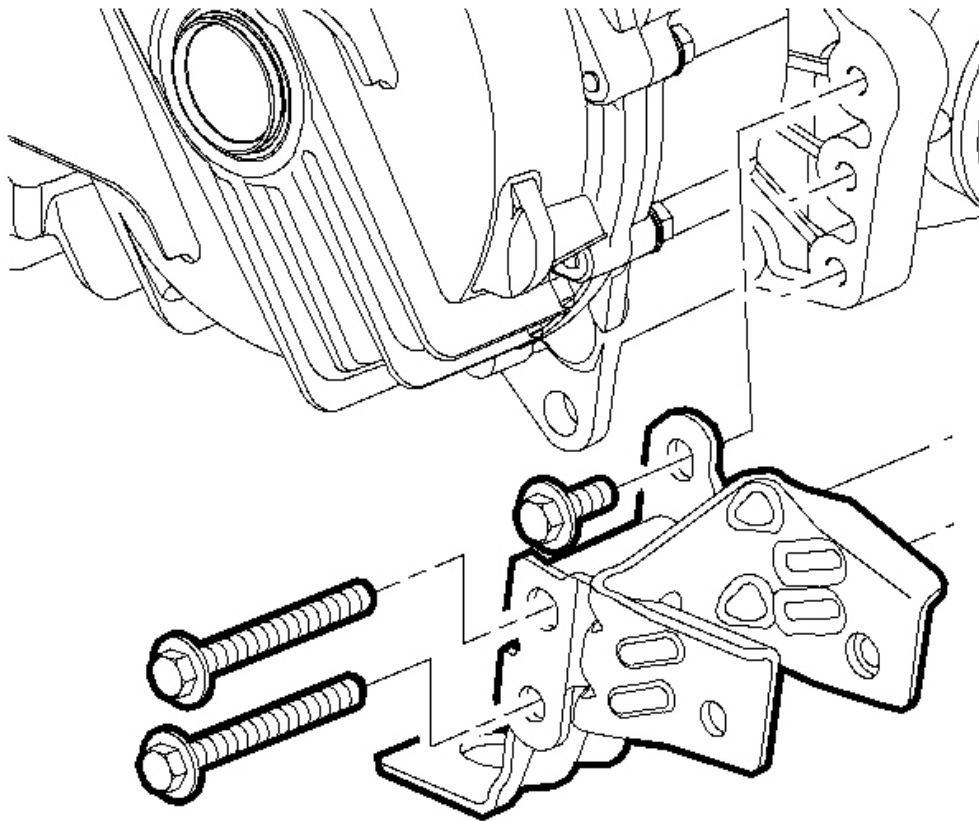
Removing Rear Powertrain Mount Bracket Bolts From The PTU
